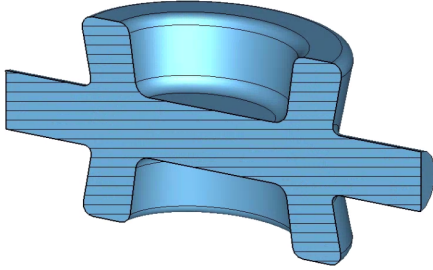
HOM Coupler for the SPS DQW crab cavity.
